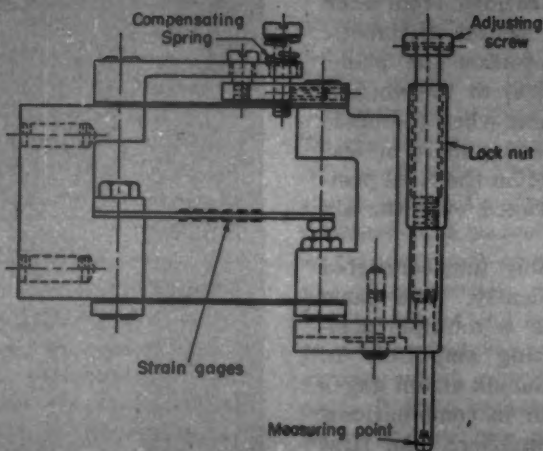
Left — Measuring probe mounted on two parallel reeds to allow vertical motion of probe. Four strain gages, mounted on a third reed, indicate deflections of the measuring point
